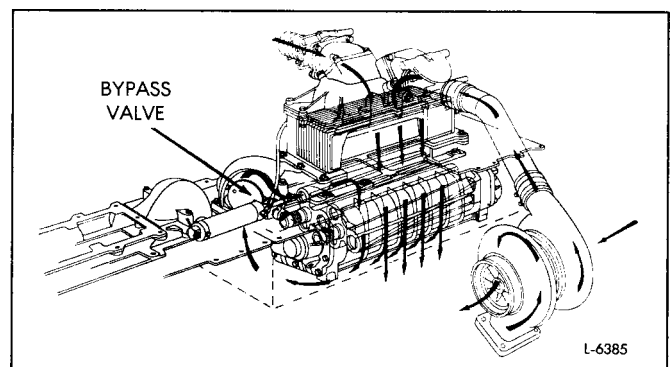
Air Flow Schematic - Former Flapper Style Blower Bypass Valve-Equipped Engine
